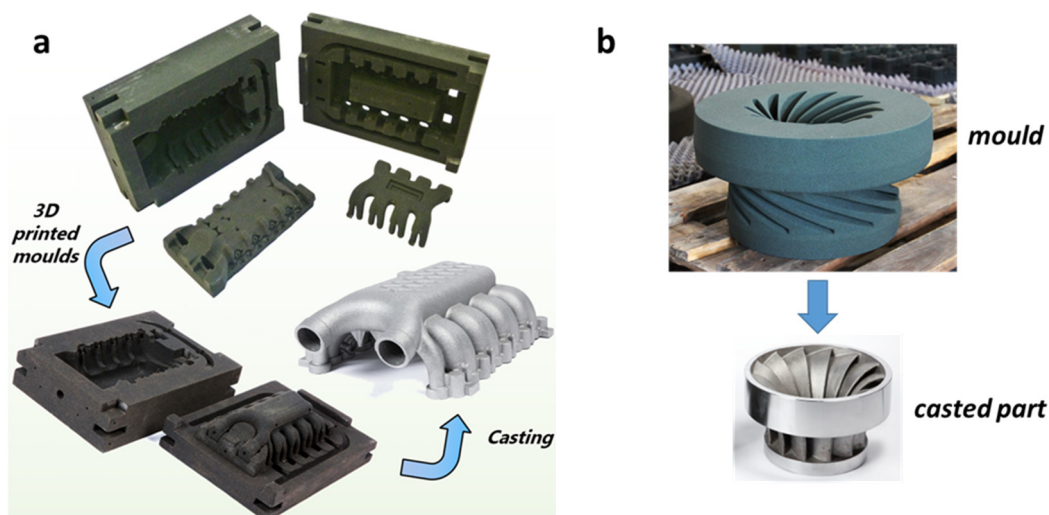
Examples of metallic parts fabricated by casting of sand molds printed by BJ. a) Engine cover, b) turbine. Adapted from Siravupan, et al, 2021.
